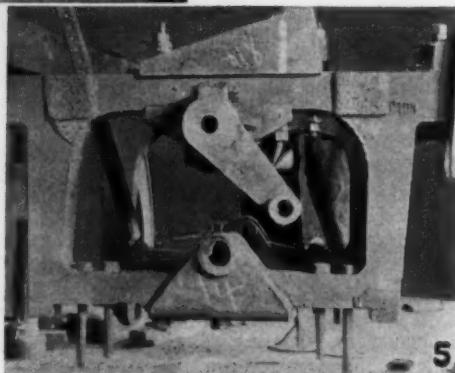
Frame section after welding, with braces in place. This section replaced a similar section which had become defective. Fig. 5—A new top rail was welded into this frame, saving the expense of a new frame.
